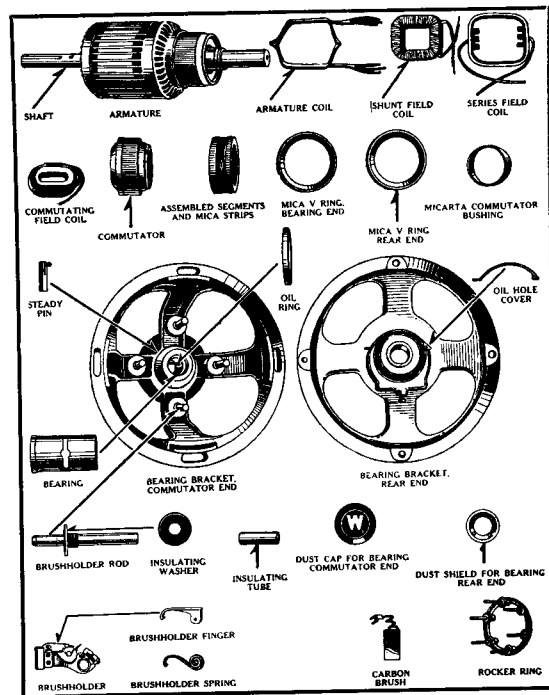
RENEWAL PARTS FOR TYPE SK GENERATORS
